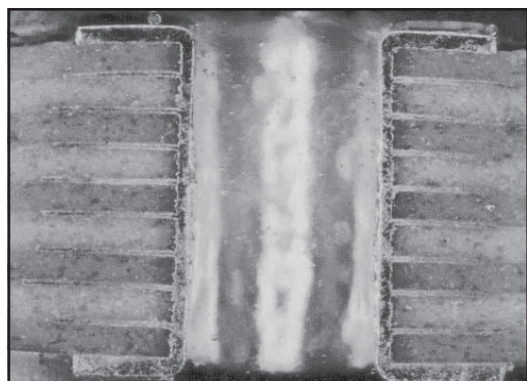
Cross section of 9-layer dual stripline board showing plated thru hole and layer-to-layer registration.
